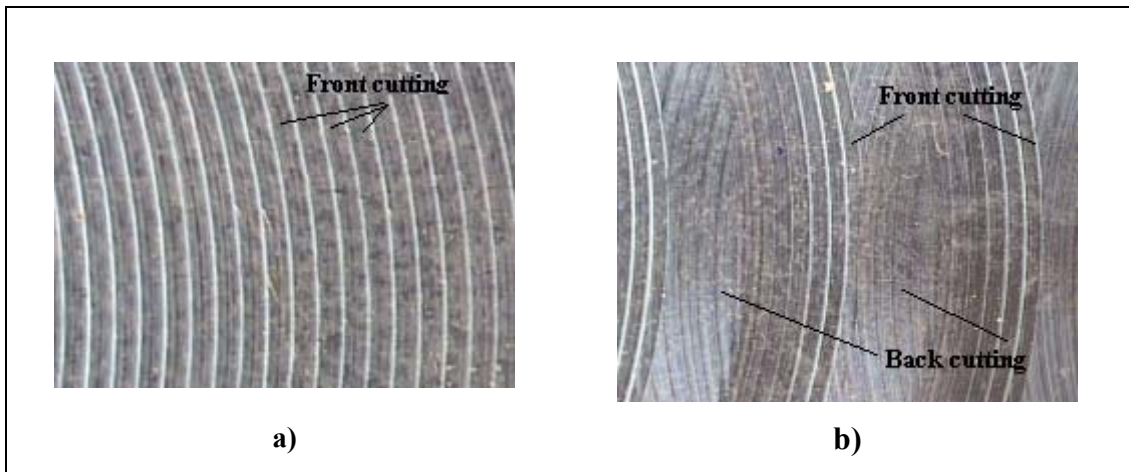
Pictures of the trail left by the tool on the Al 7075-T7351 machined surface after face milling with square inserts.
